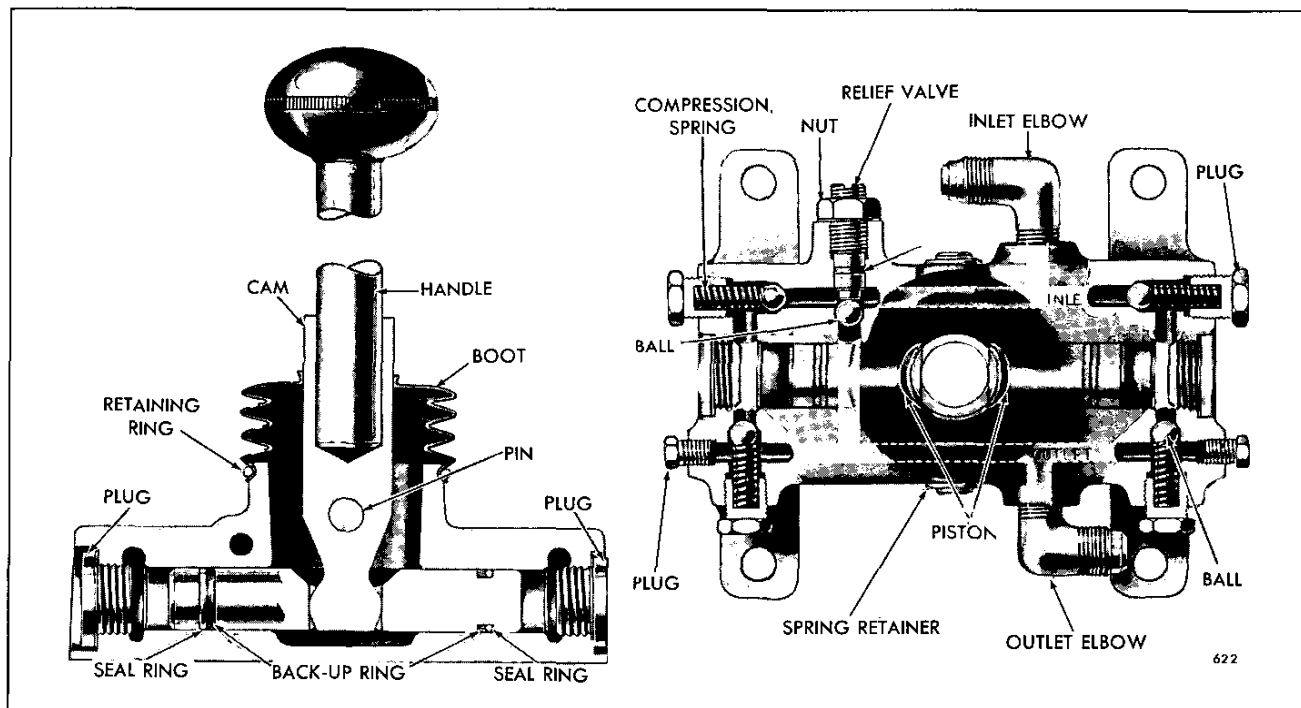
Cross Sections of Hydrostarter Hand Pump
